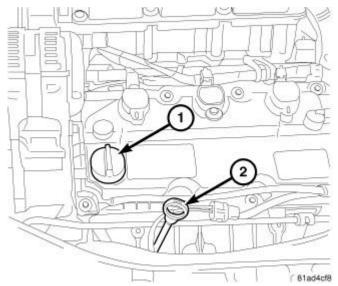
ENGINE OIL FILLER CAP AND DIPSTICK Courtesy of CHRYSLER LLC
